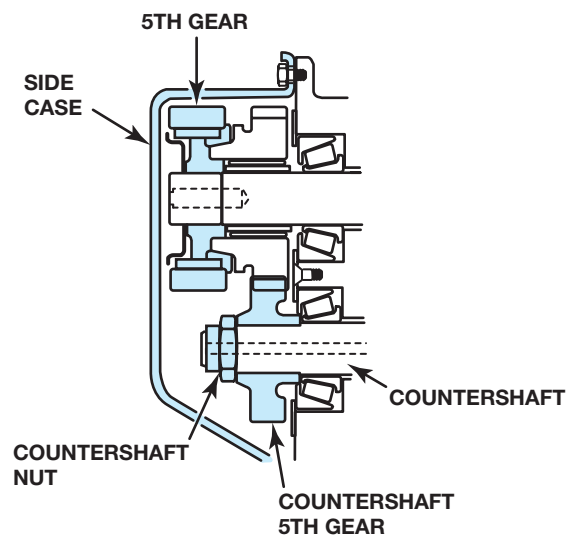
Disassembly of this transaxle begins with the removal of the side case, fifth-gear synchronizer assembly, and the countershaft fifth gear.
